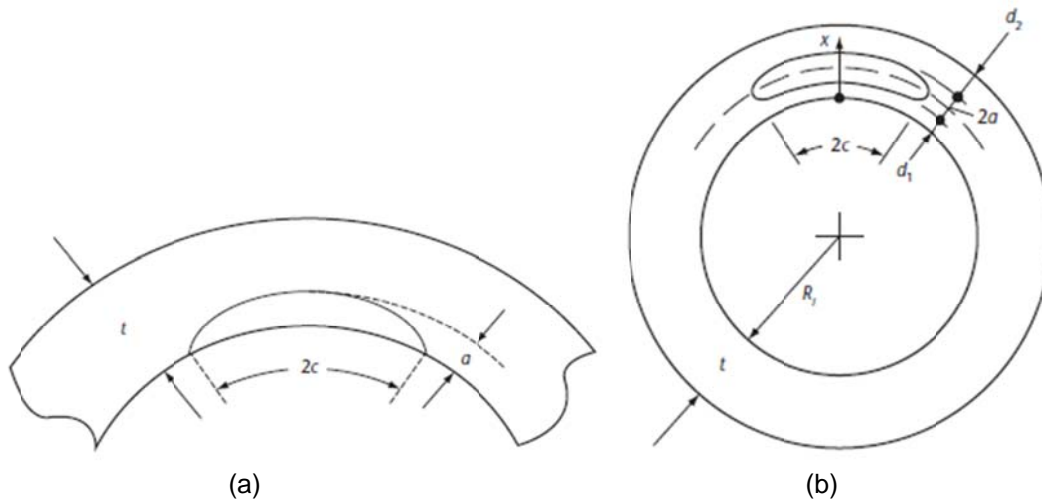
Classification of weld defects according to CSA Z662.07 (a) Figure C3 from CSA Z662.07: Surface breaking defects and (b) Figure C4 from CSA Z662.07: buried defect
